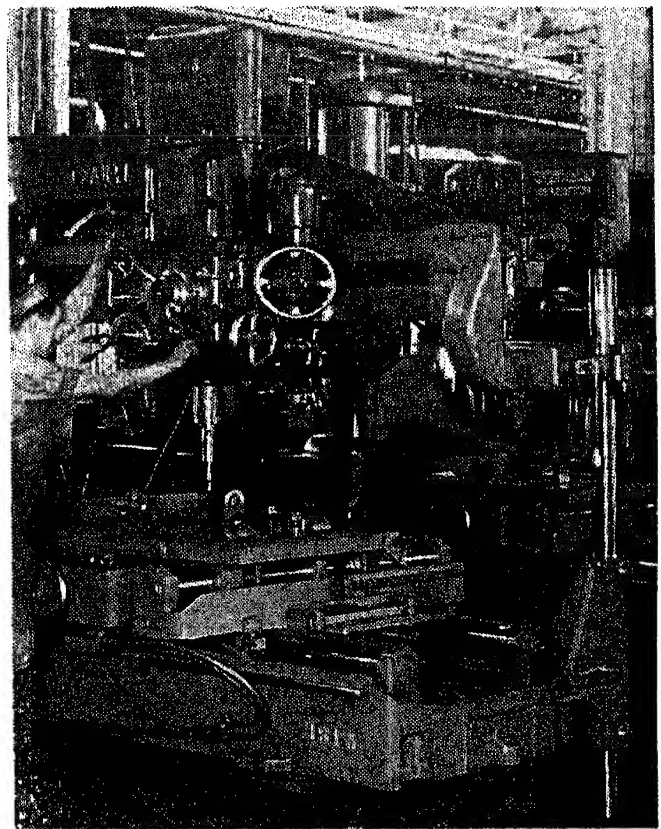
A 30 in. by 20 in. hole spacing device on a radial drill for positioning holes in a workpiece. (Courtesy Bullard Co.)
